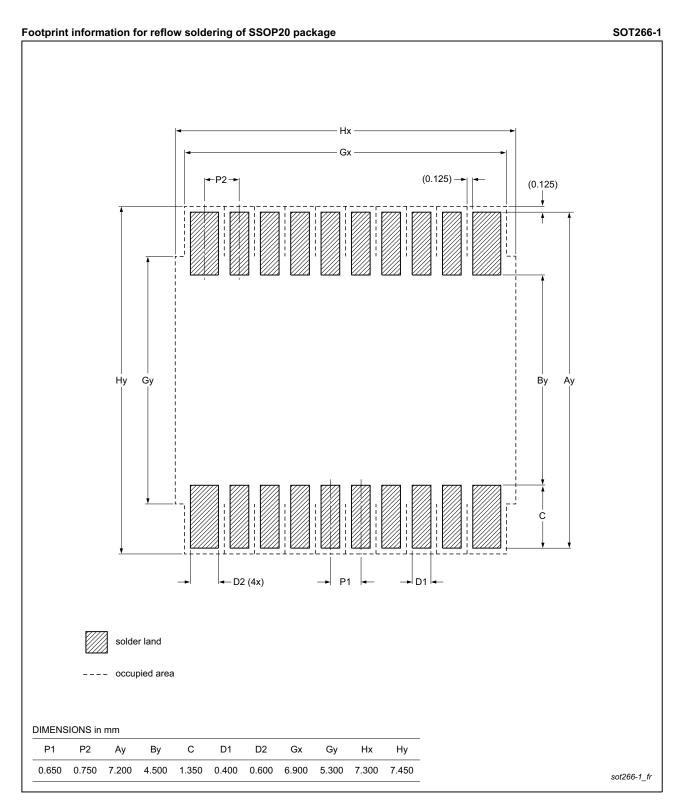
PCB footprint for SOT266-1 (SSOP20); reflow soldering
